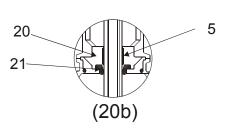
Installation of Piston and Spring Assembly Using Insertion Sleeve
